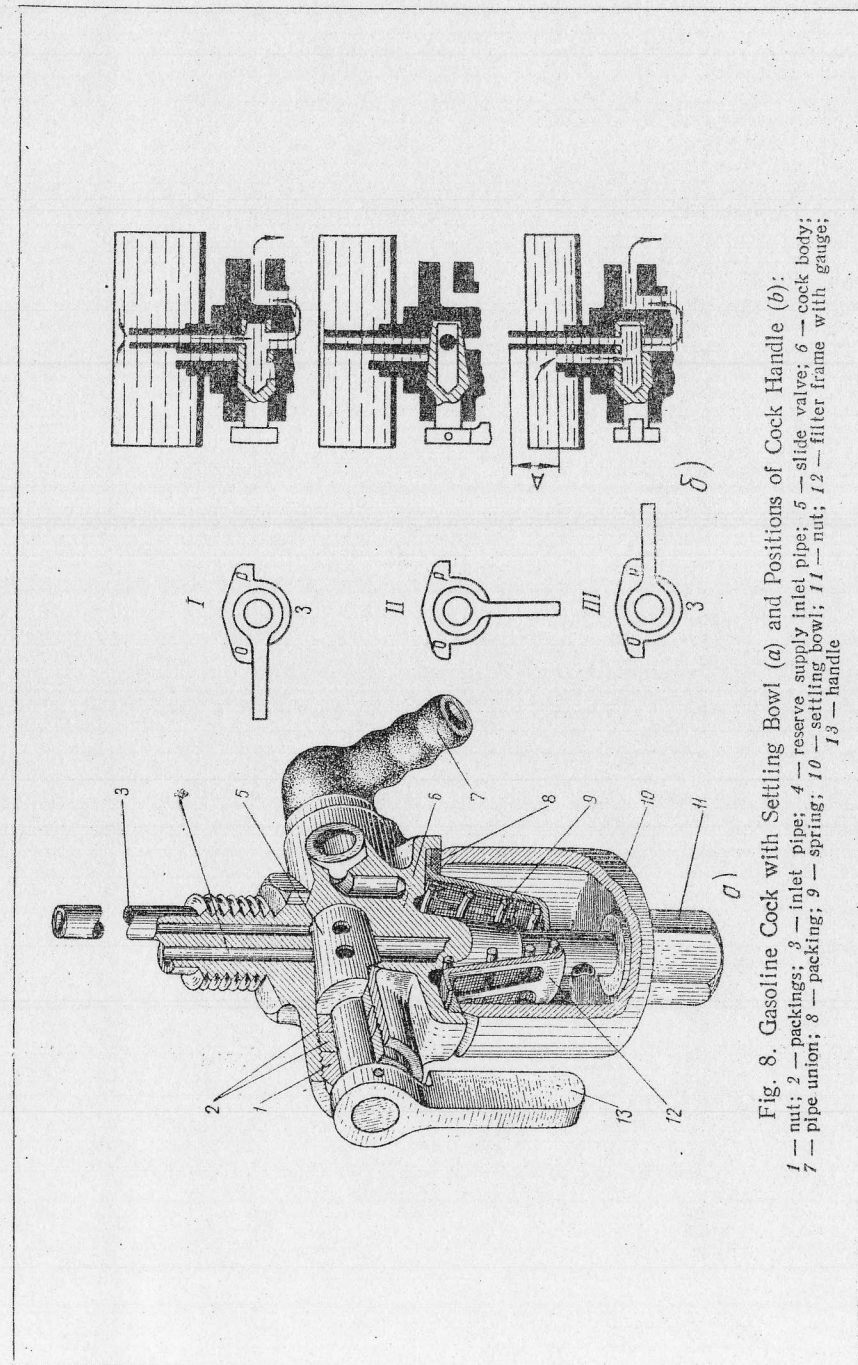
Gasoline Cock with Settling Bowl (a) and Positions of Cock Handle (b):
